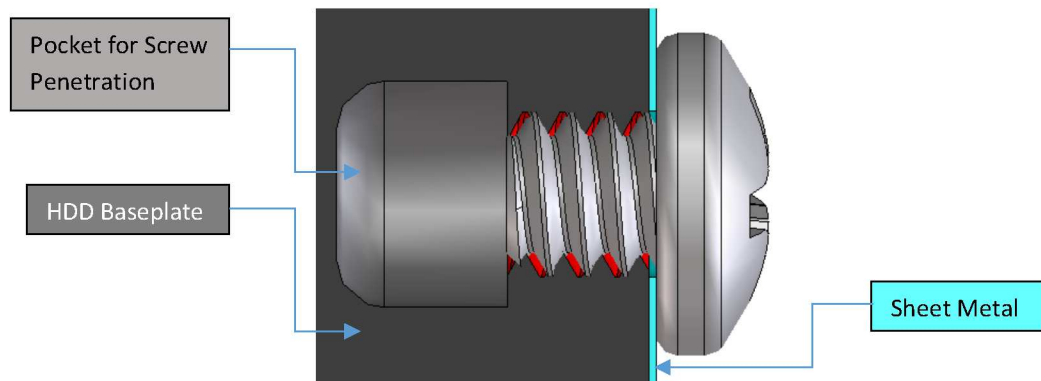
Side mount hole, 6-32UNC x 1/8" (3.8 threads engagement)
